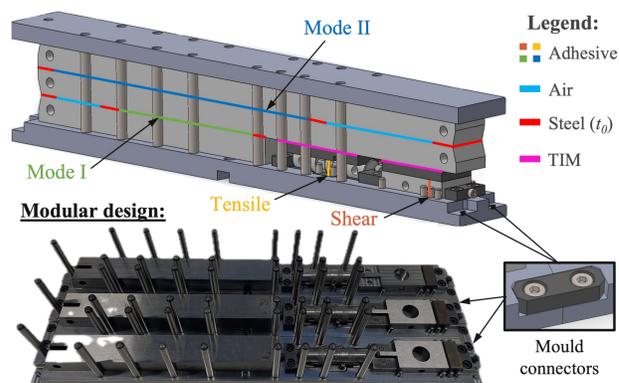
Unified mould: manufacturing staking sequence and modular design.
